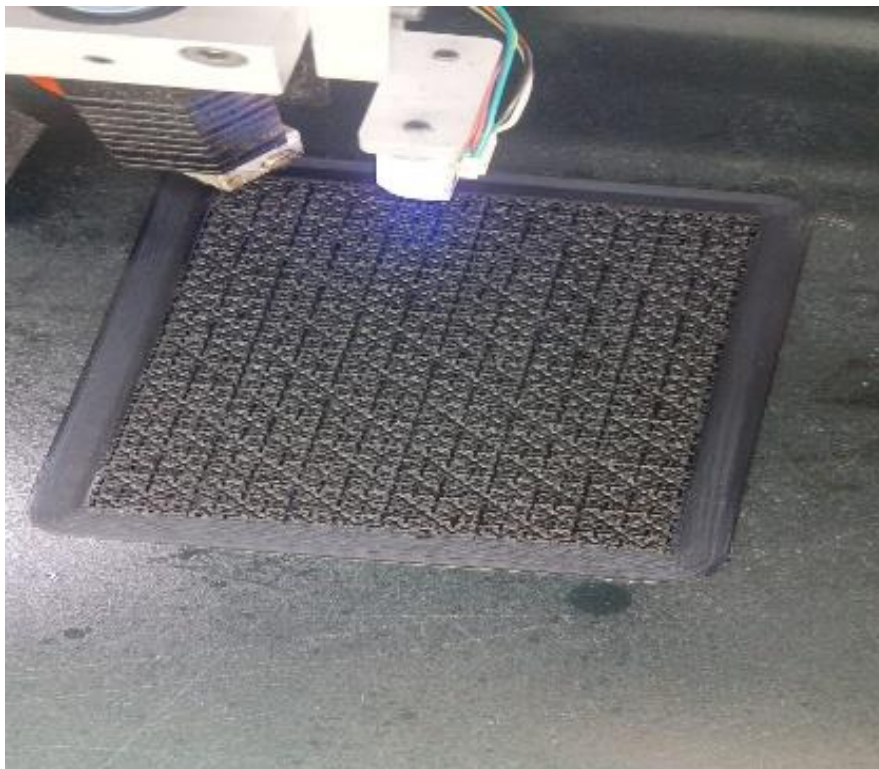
Specimens printing on Pratham 3.0 FDM Printer.
